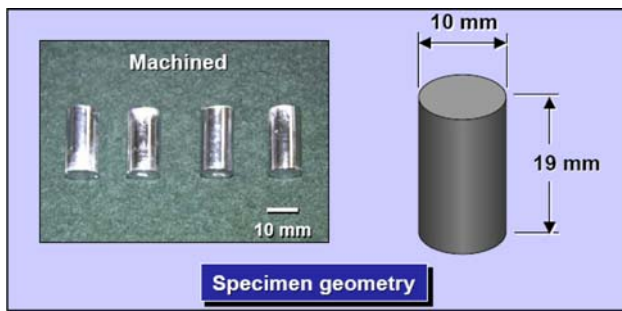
Machined cylindrical solder specimen for compression testing [61]
